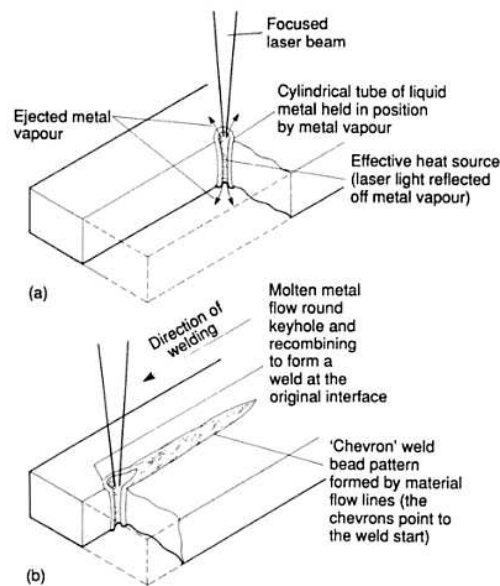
The process of laser welding; the absorption of the focused laser beam causes material to be evaporated creating a keyhole which is held open by the vapour pressure within the cavity. The beam is then moved across the weld joint leaving a trail of solidified molten material (Dawes 1992).
